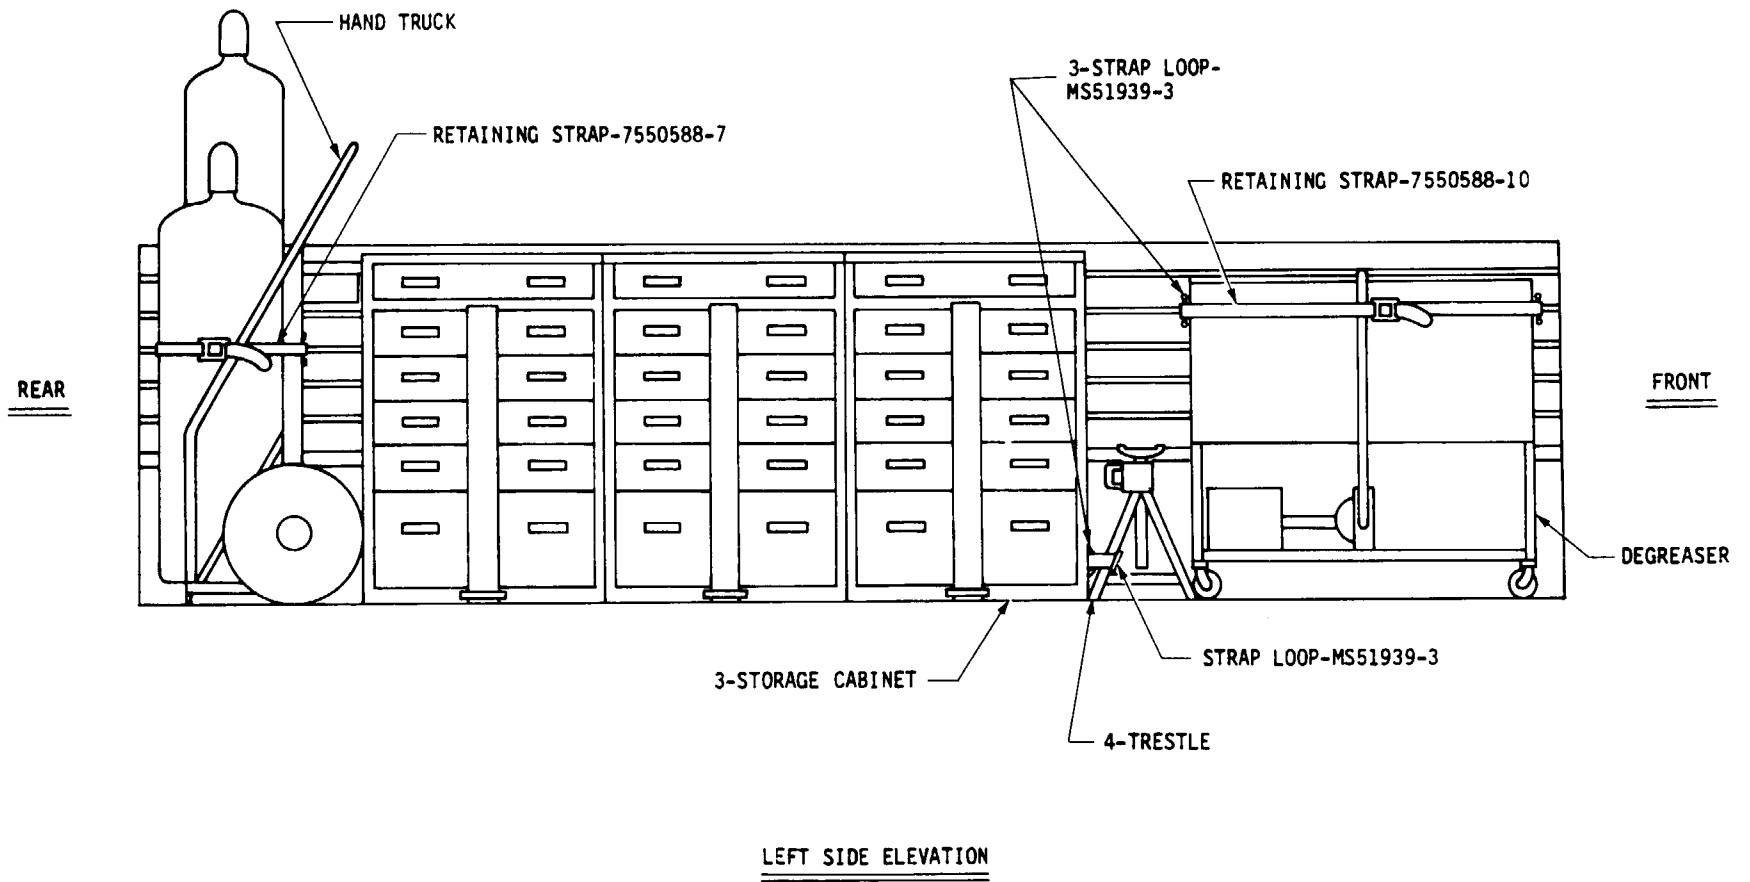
Components to be Mounted, Unit 3, M35A2, Left Side Elevation.
